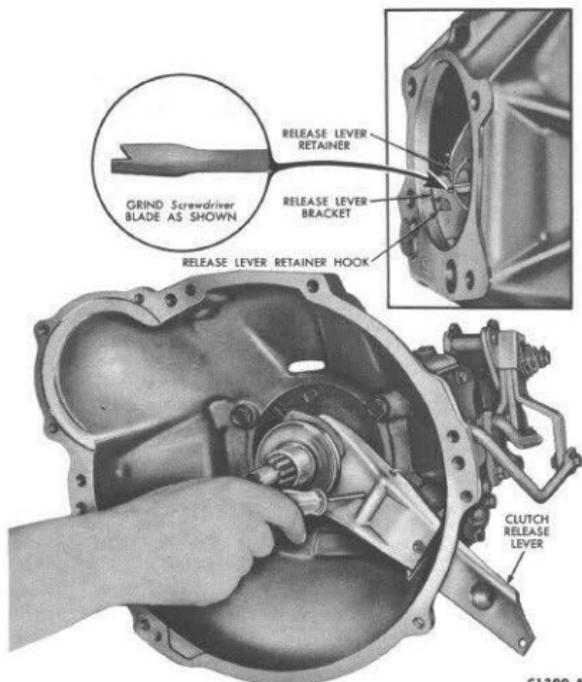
Removing or Installing Clutch Release Lever Retainer
